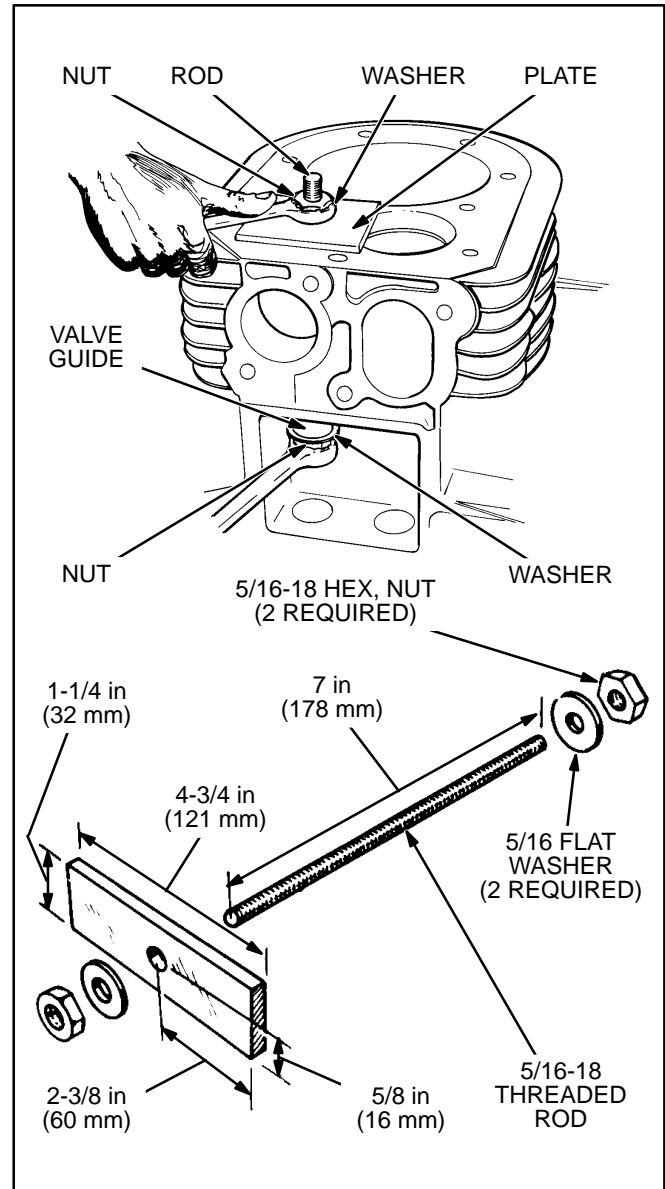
SUGGESTED TOOL FOR INSTALLING THE VALVE GUIDES
